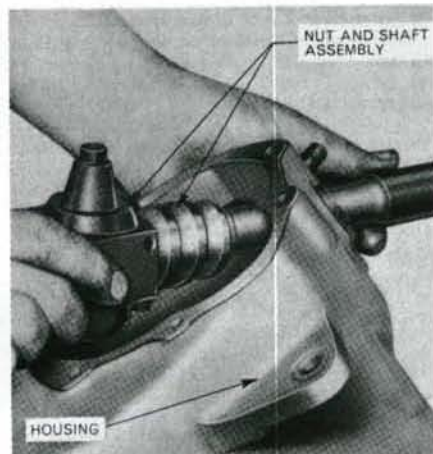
Removing ball nut and steering shaft assembly from gear housing.
